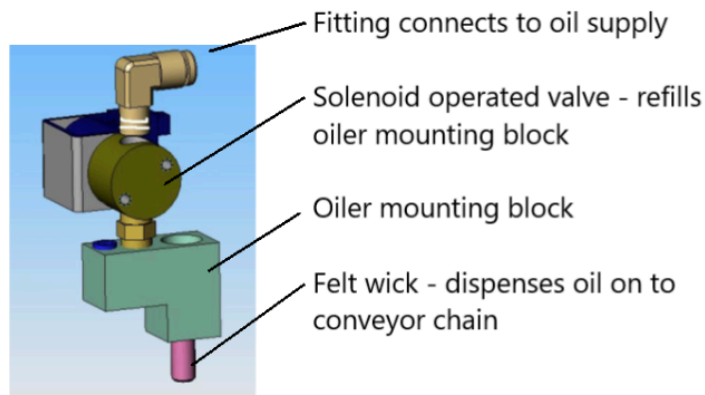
Heller assembled Automatic chain lubrication system outside vacuum chamber [9]
